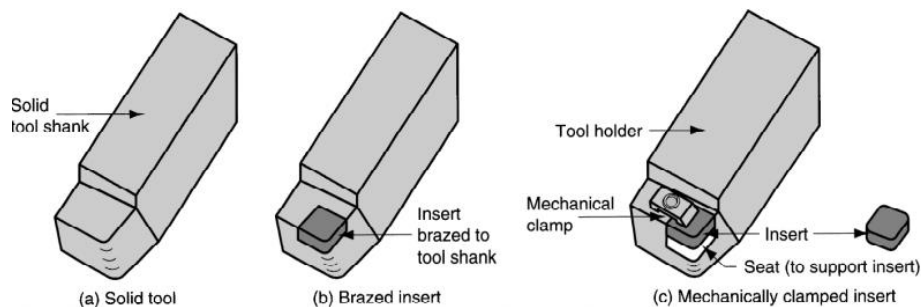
Three ways of holding and presenting cutting tool edge for a single-point tool [42]
